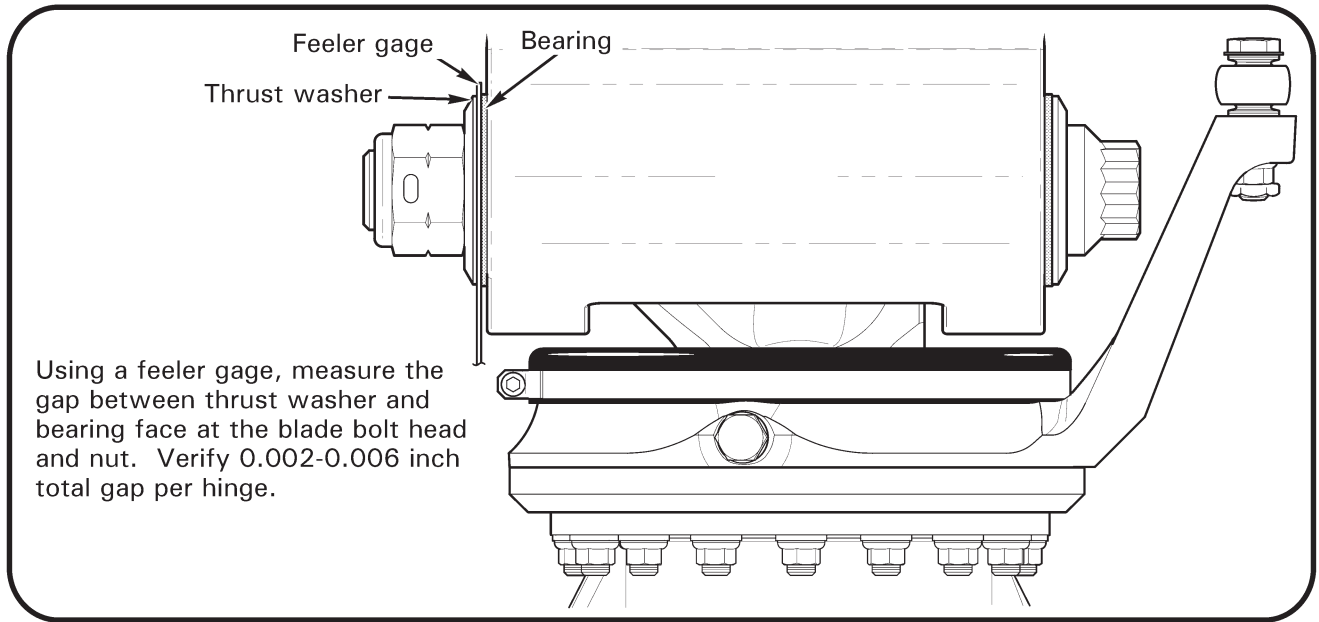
A MEASURING CONING HINGE AXIAL CLEARANCE
